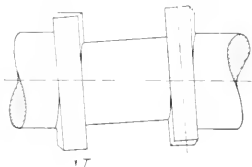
PART OF CRANKSHAFT ILLUSTRATING DEFLECTION OF CRANK-CHEEKS
